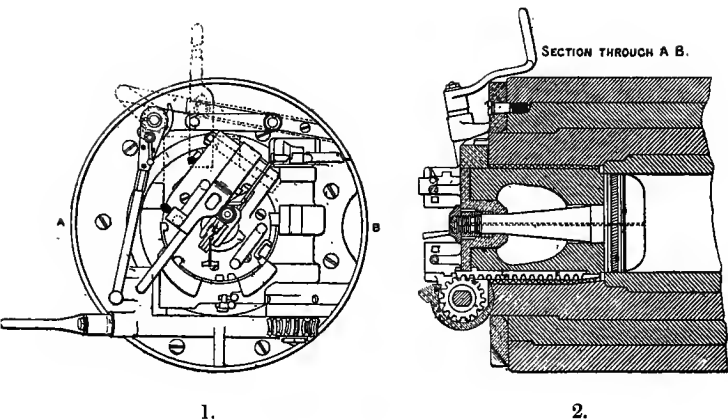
6-INCH HAND-WORKED BREECH MECHANISM.
